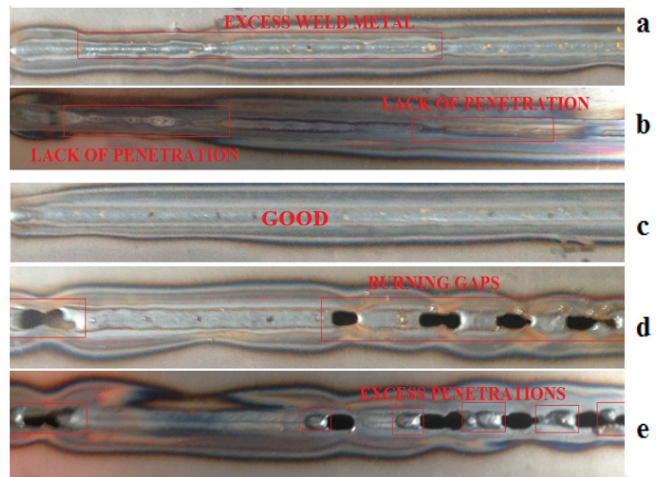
Visual categorization of weld inspection of the samples: (a) Excess weld metal, (b) Lack of penetration, (c) Good, (d) Burning gaps, (e) Excess penetration
